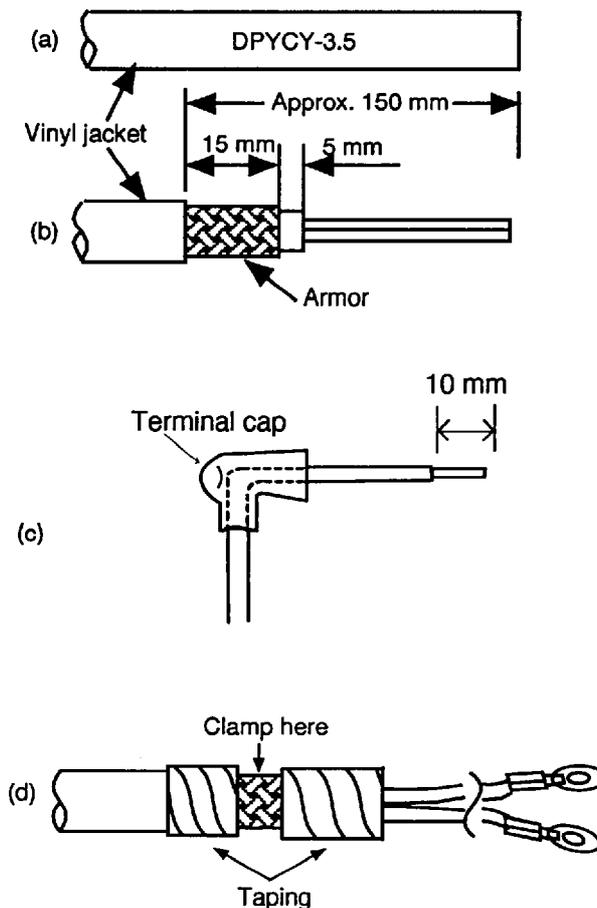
How to fabricate power cable DPYCY-3.5
